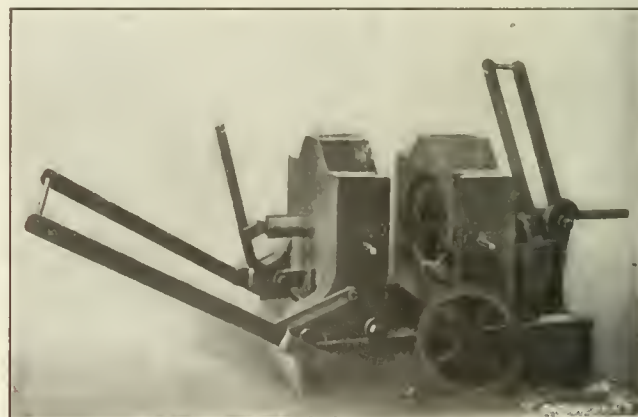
Mold for Mining Car Wheel, Mold open, Casting removed
